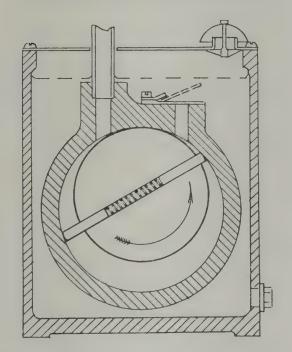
Oil-sealed High-Vacuum Pump.
